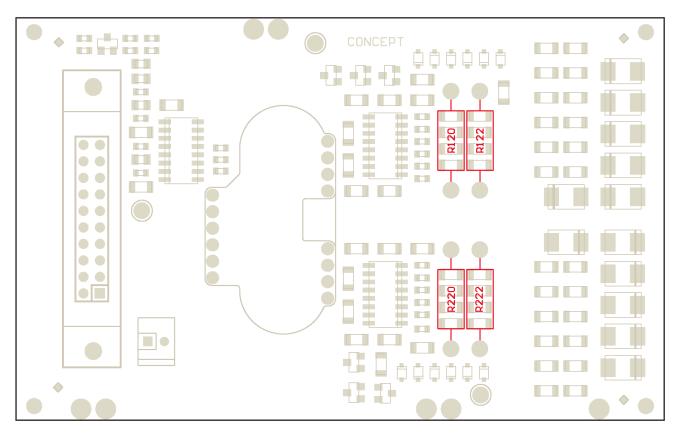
Assembly drawing of 2SP0115T with highlighted gate resistors
